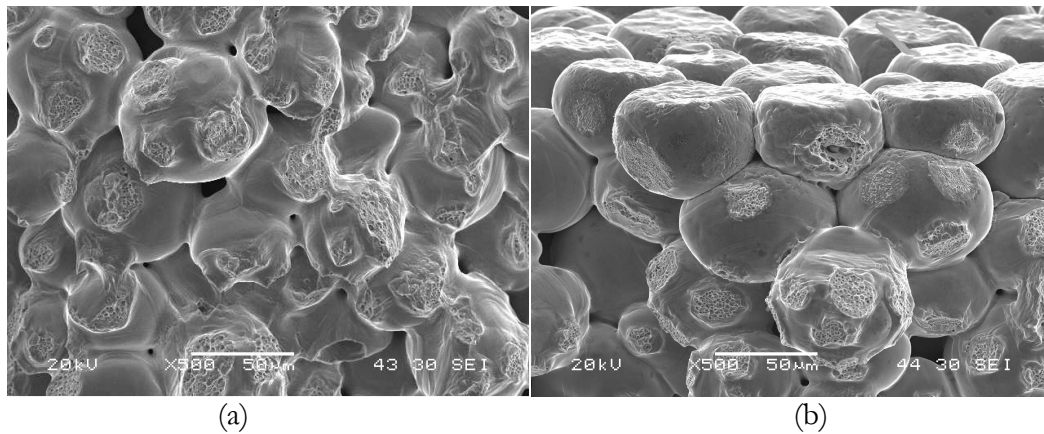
Fracture surfaces of 550MPa compacted a) 780°C and b) 700°C TRS bars.
